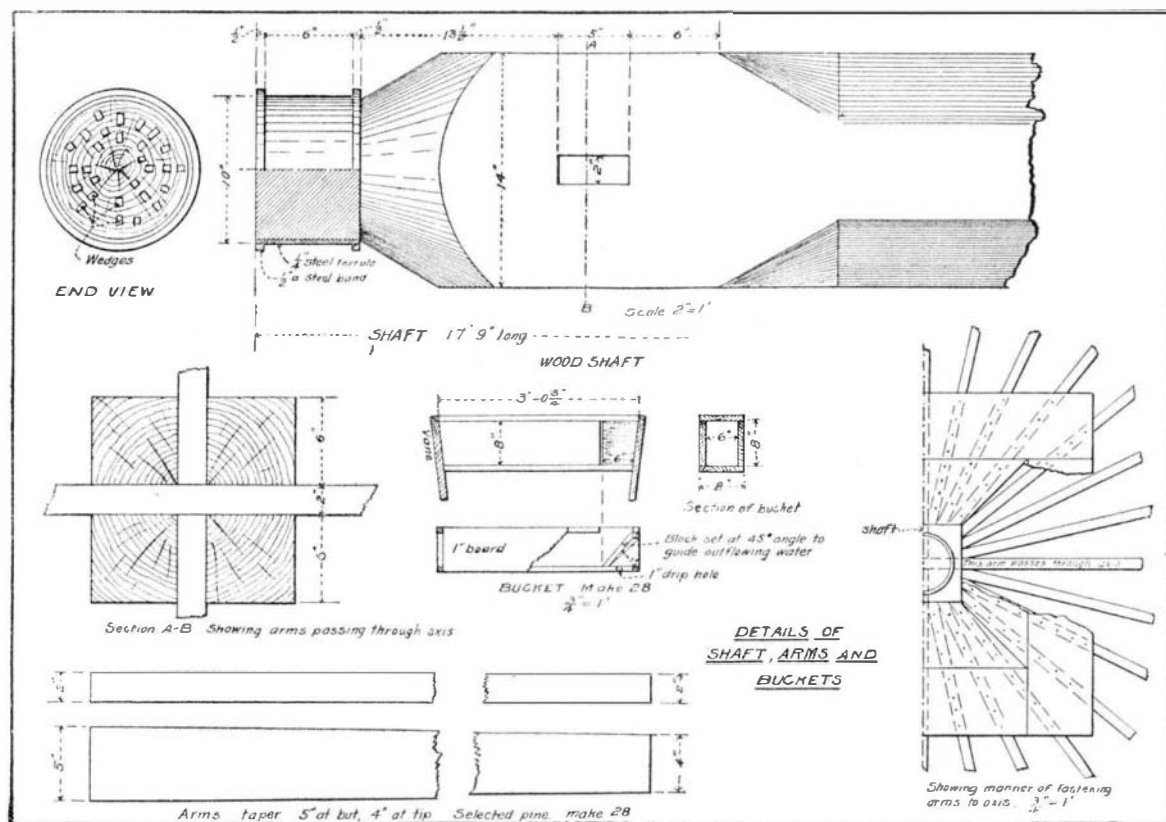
DETAILS OF WHEEL SHOWN IN FIG. 14.
